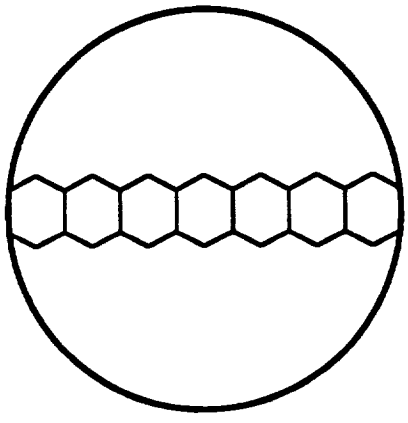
ASSEMBLY METHODS FOR THE AEROBRAKE SHIELD
